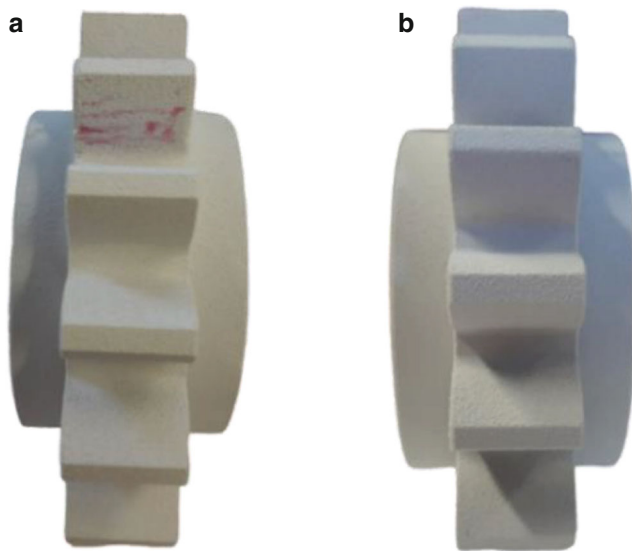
Liquid Penetrant Inspection for crack defects. a Reconstructed tooth 9 with cracks and b Material base teeth free of defects
